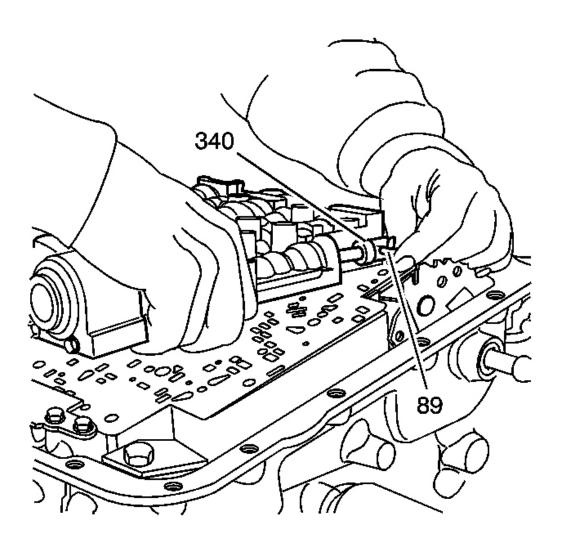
Disconnecting Manual Valve Link Courtesy of GENERAL MOTORS CORP.
